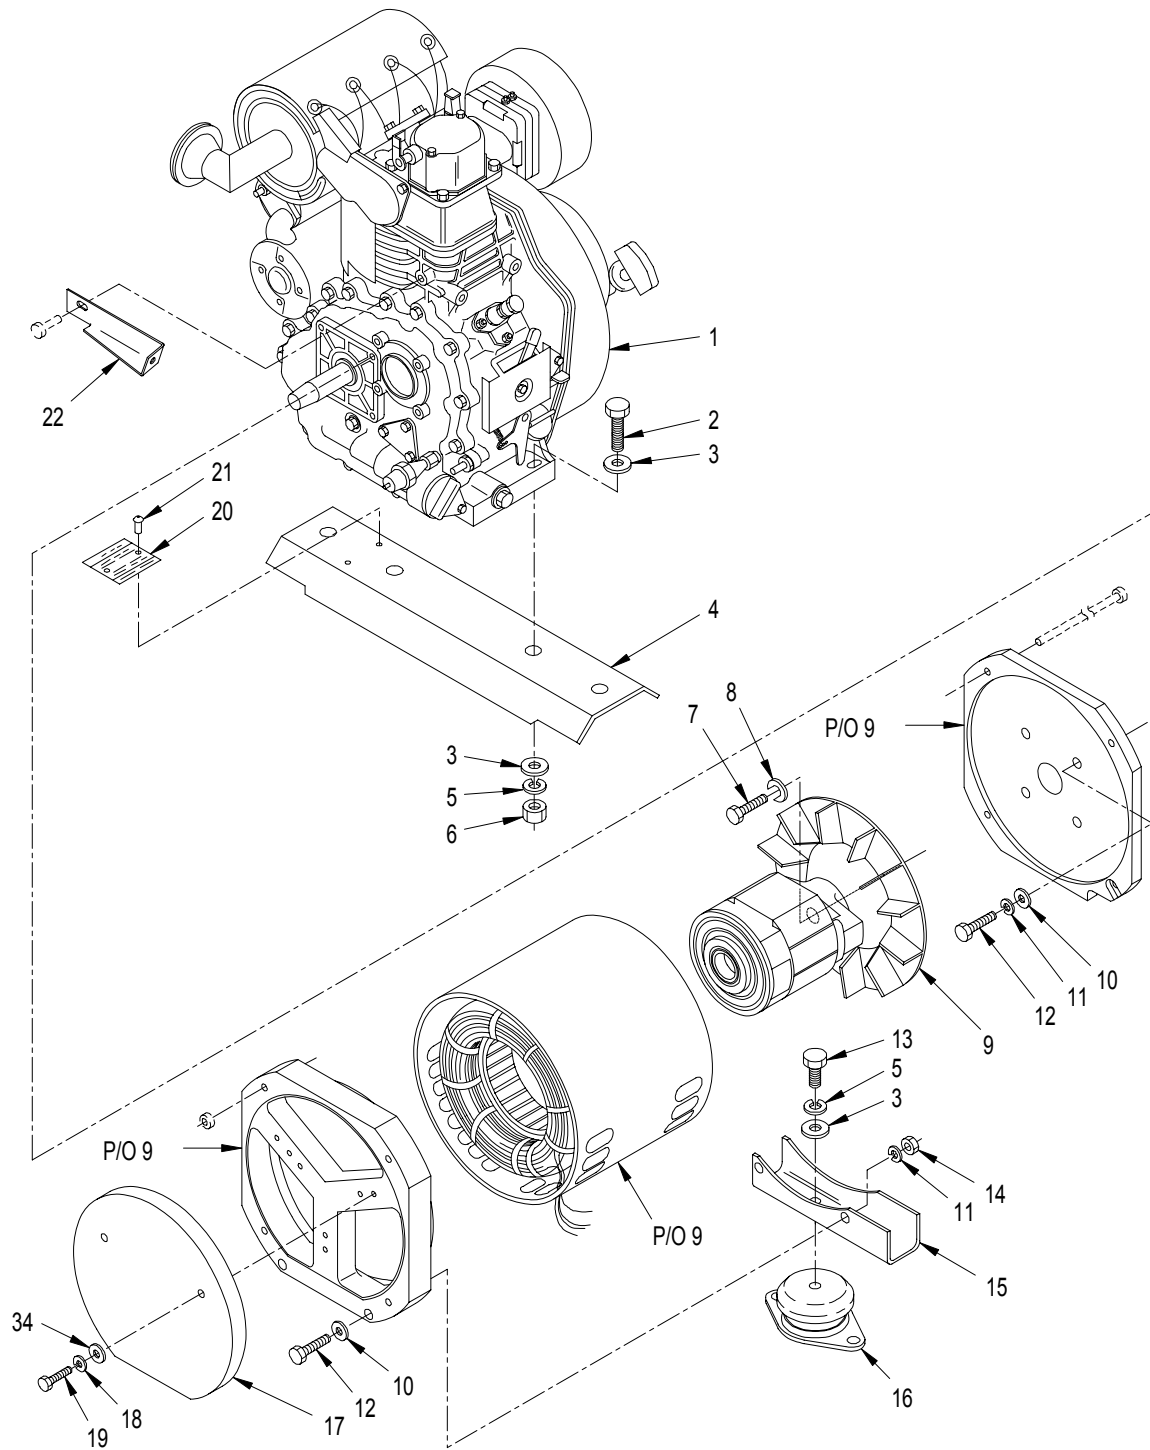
Engine Alternator Assembly (MEP-531A) (Sheet 1 of 2)
